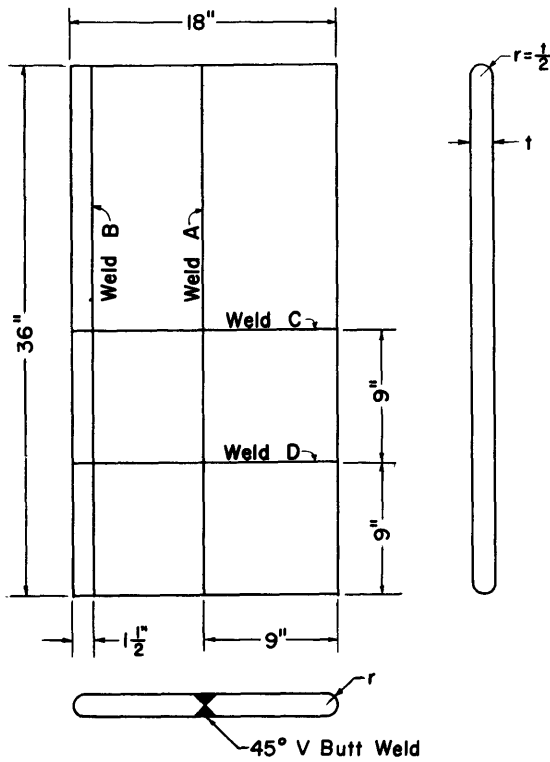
Typical Test Plate and Welding Locations
